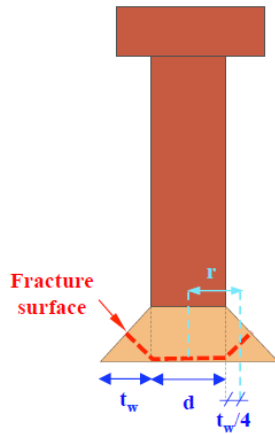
Fracture surface of the stud welds (Hutchinson et al. 2014)
